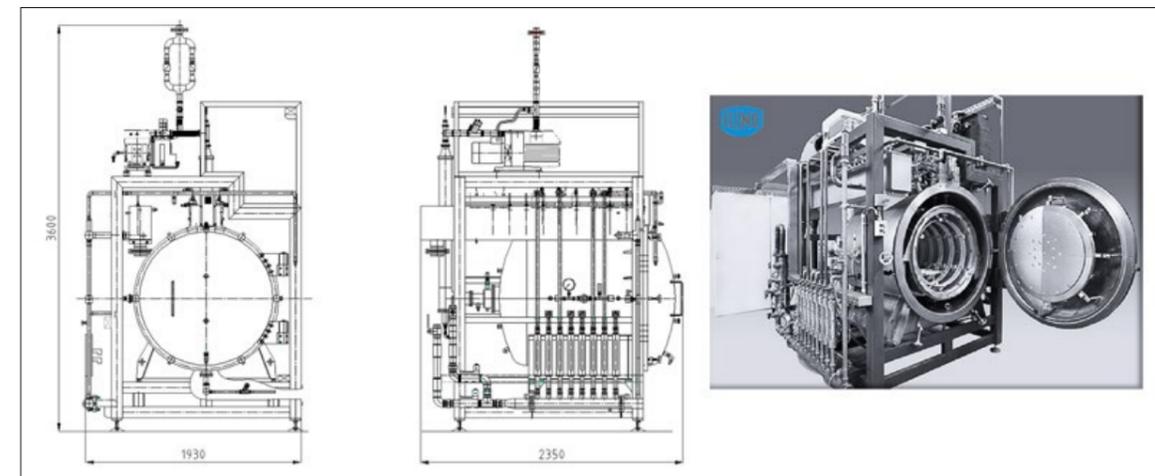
Batch sintering ECO-MIM furnace type VR 050-145
